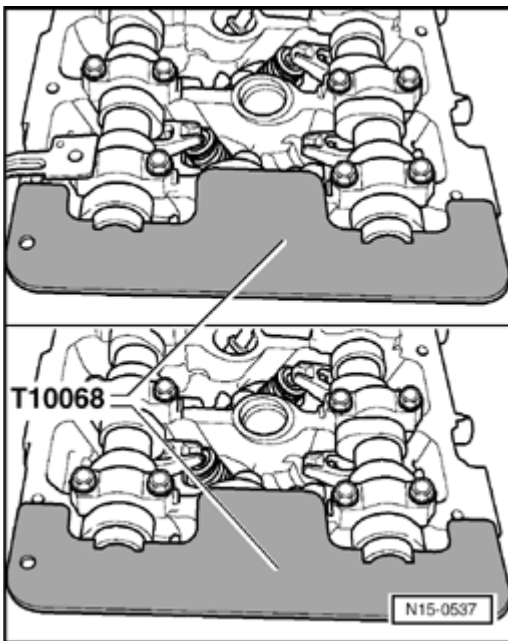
Camshaft Bar T10068 Engaging In Both Shaft Grooves
